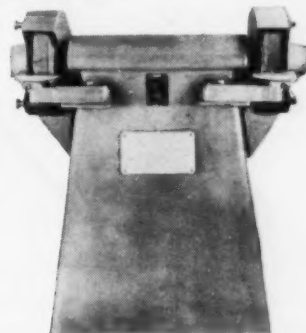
Present welded steel design. Quality of product and appearance improved to enhance sales appeal. Stability increased by lowering motor into pedestal base. Weight is cut 35% yet product is more rigid and costs 12% less to produce. Courtesy, The Bridgeport Safety Emery Wheel Co., Inc., Bridgeport, Conn.
